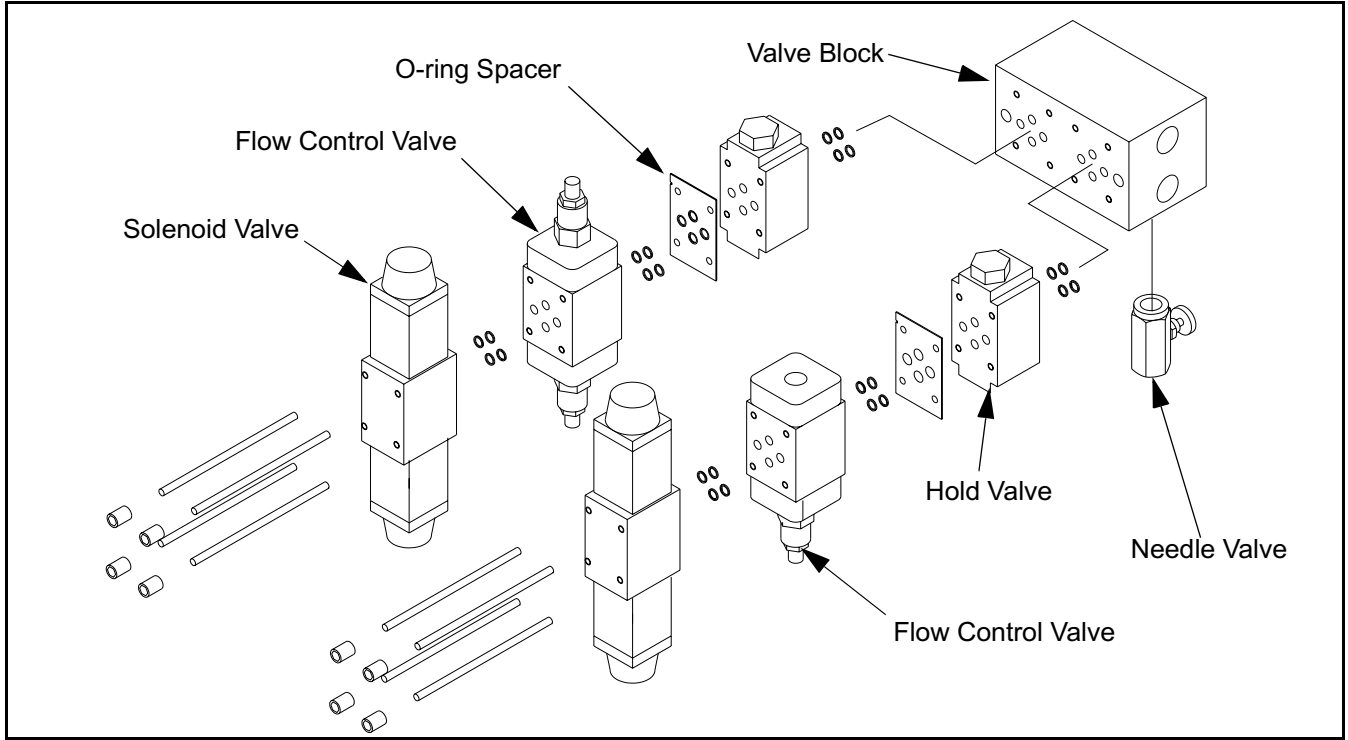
30 Truck Hook/Left Tow Point Valve Bank
